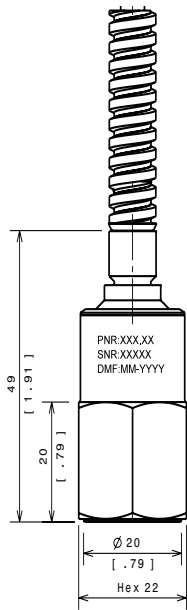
Outline drawing B=8 (cable with conduit protection electrical layout : See above B=5)
